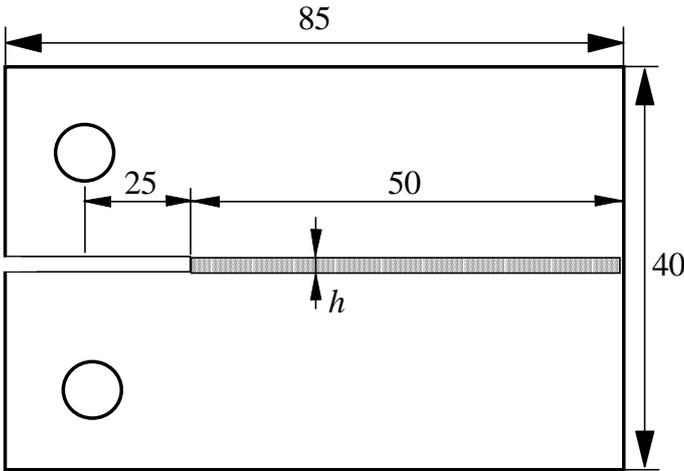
Compact tension (CT) specimen (all dimensions in mm).
